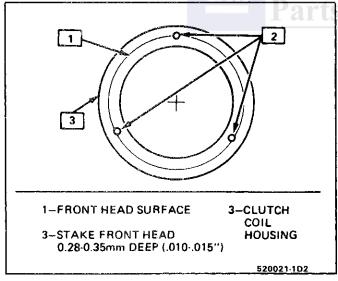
Details of Stakes in Front Head for Clutch Coil
